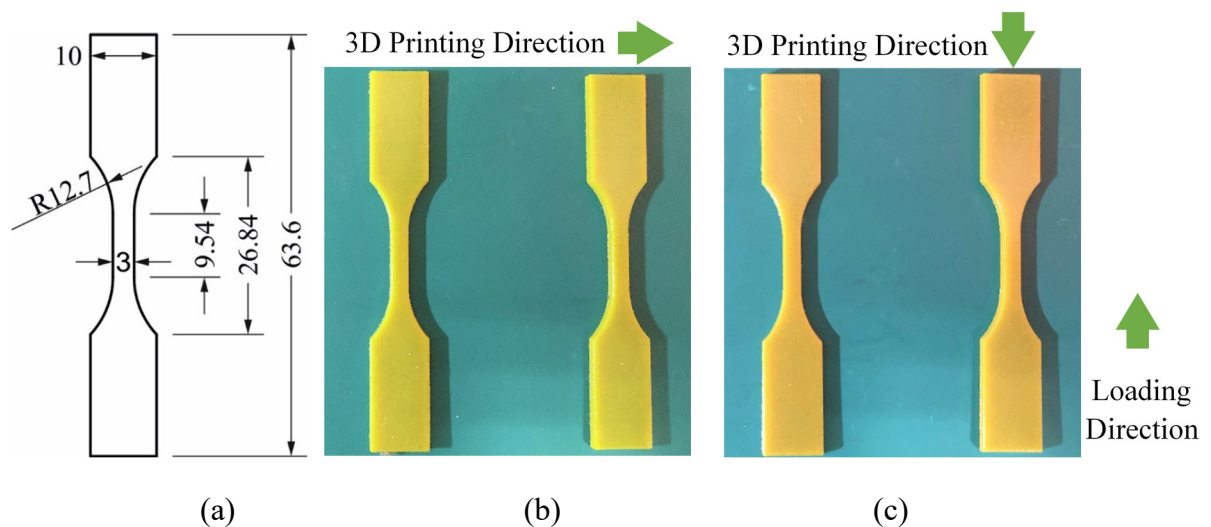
Tensile test specimens: (a) Dimensions of the dumbbell specimen; (b) dumbbells printed in transverse direction; (c) dumbbells printed in perpendicular direction
